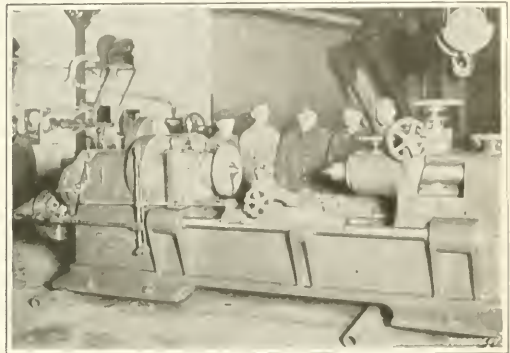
Finished Shell Lathe, and Gang of Four Men and Foreman who assembled it in Six and One-quarter Hours
